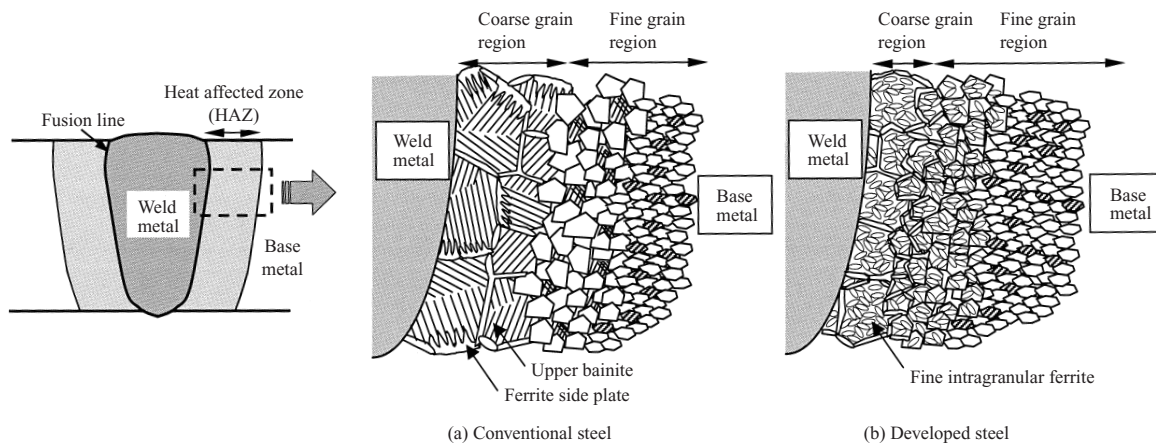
Schematic diagram of large heat input welded joint
